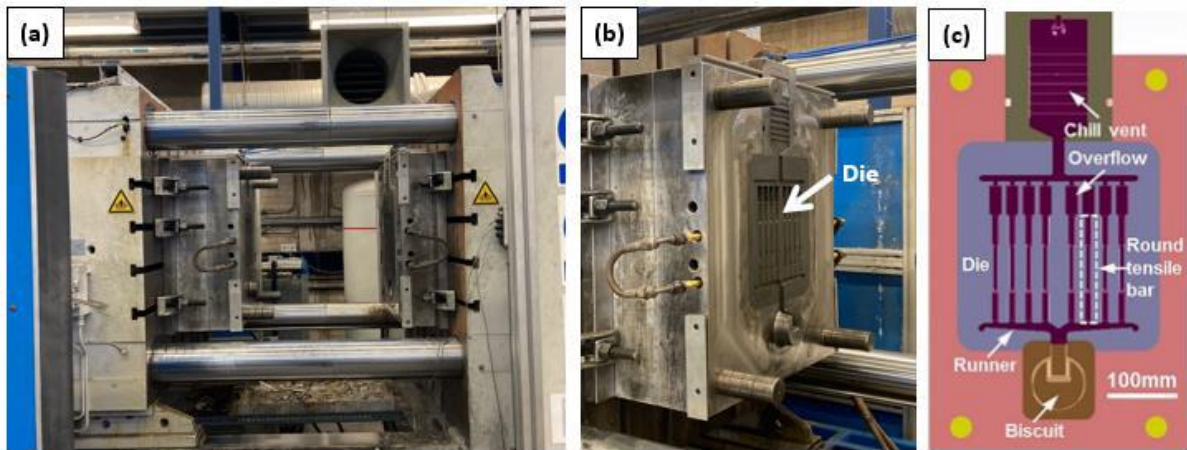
(a) High pressure die casting machine (b) casting chamber with tensile bar dies (c) the dimension of tensile bar specimen with overflow and biscuit (reprinted from[127])
